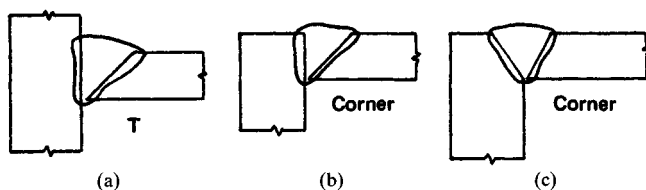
(a) Single-bevel weld used in T joint and (b) corner joint; (c) single-V weld in corner joint. (*The Lincoln Electric Company.*)
